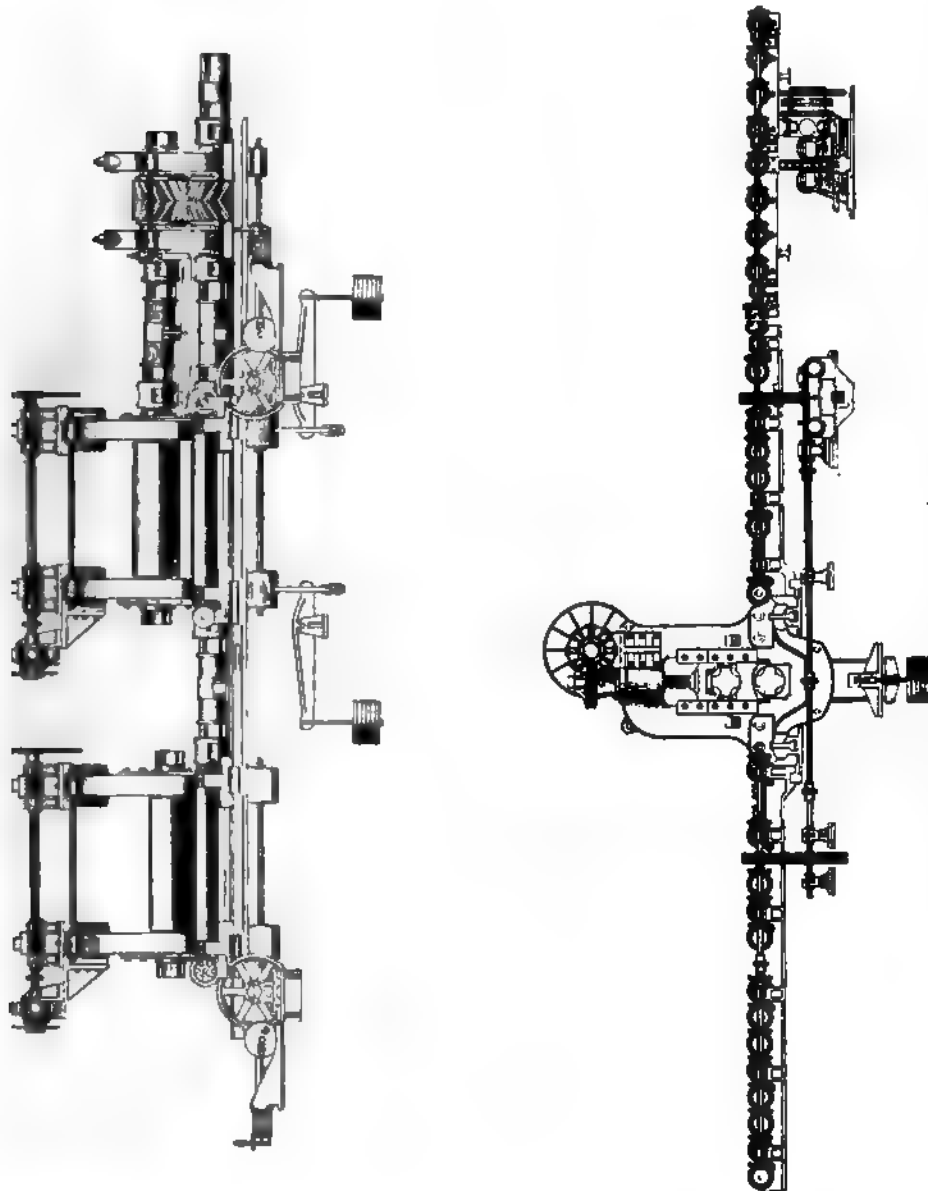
REVERSING PLATE MILL—SIDE AND END ELEVATIONS.
